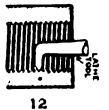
Note lathe tool cutting an inside or female thread. The tool is held stationary. Just the reverse of hand cutting.
